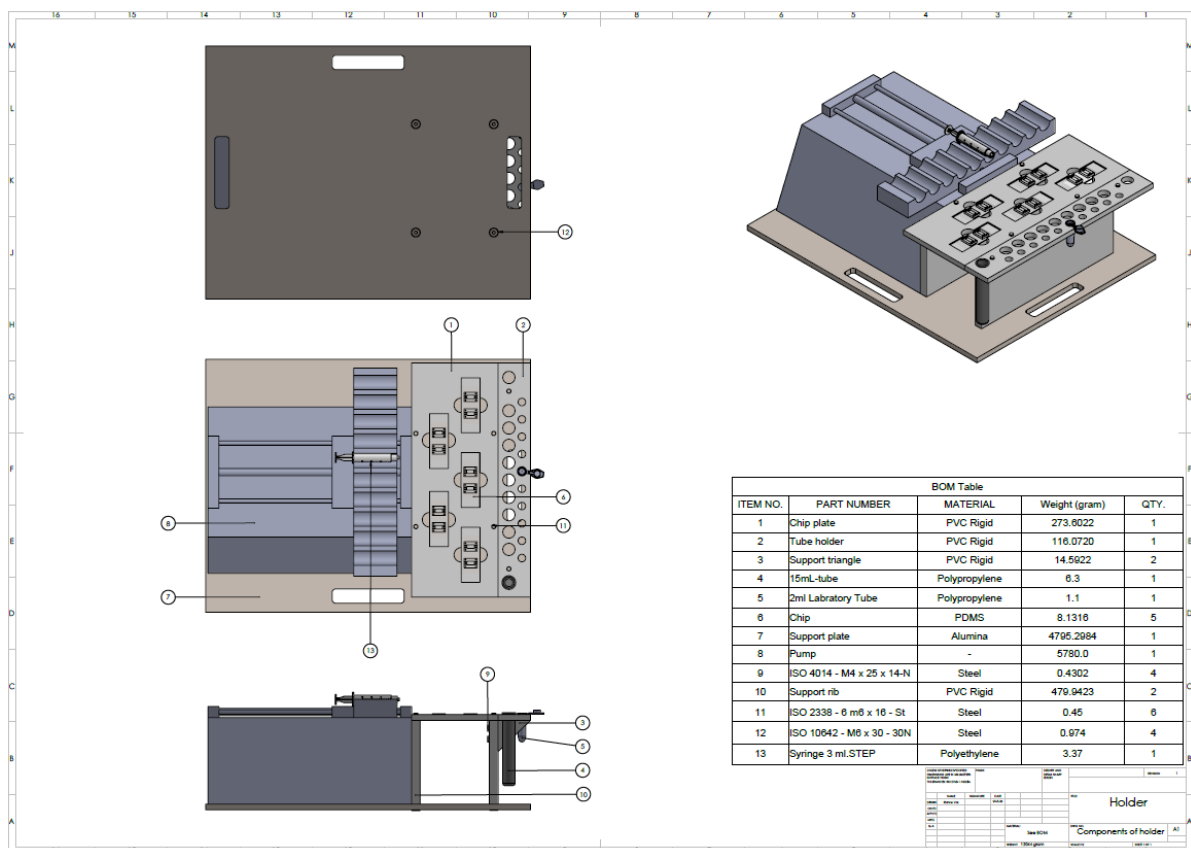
Drawing of assembly obtained using SolidWorks. The drawing illustrates all components of the holder along with their materials, weights, and quantities. The balloons in the drawing correspond to the item numbers in the Bill-Of-Material (BOM) table.
